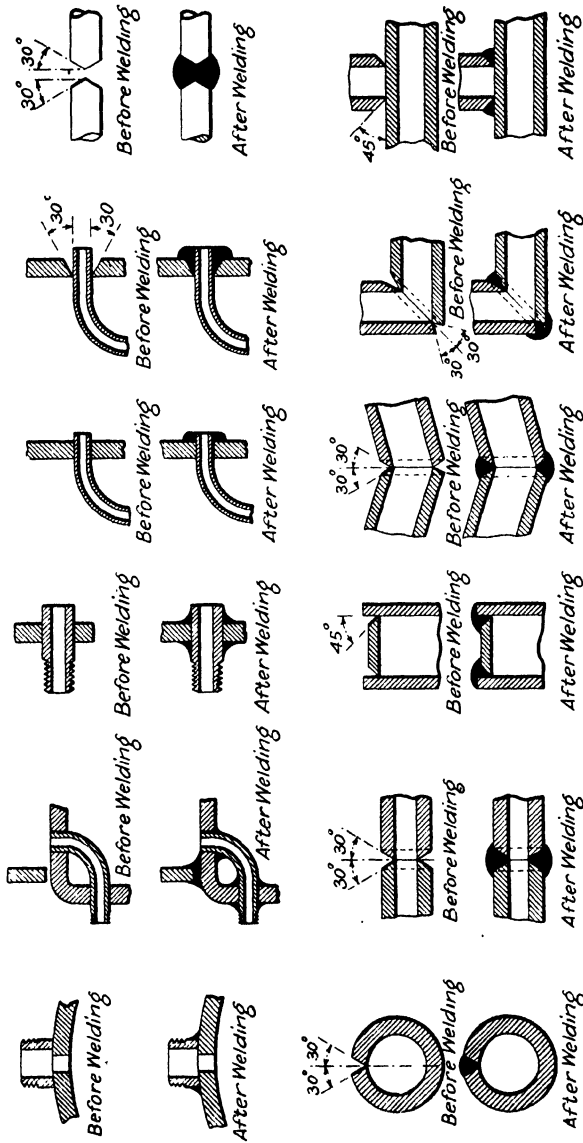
A.—METHODS OF PREPARING PIPING AND TUBULAR WORK FOR WELDING.
